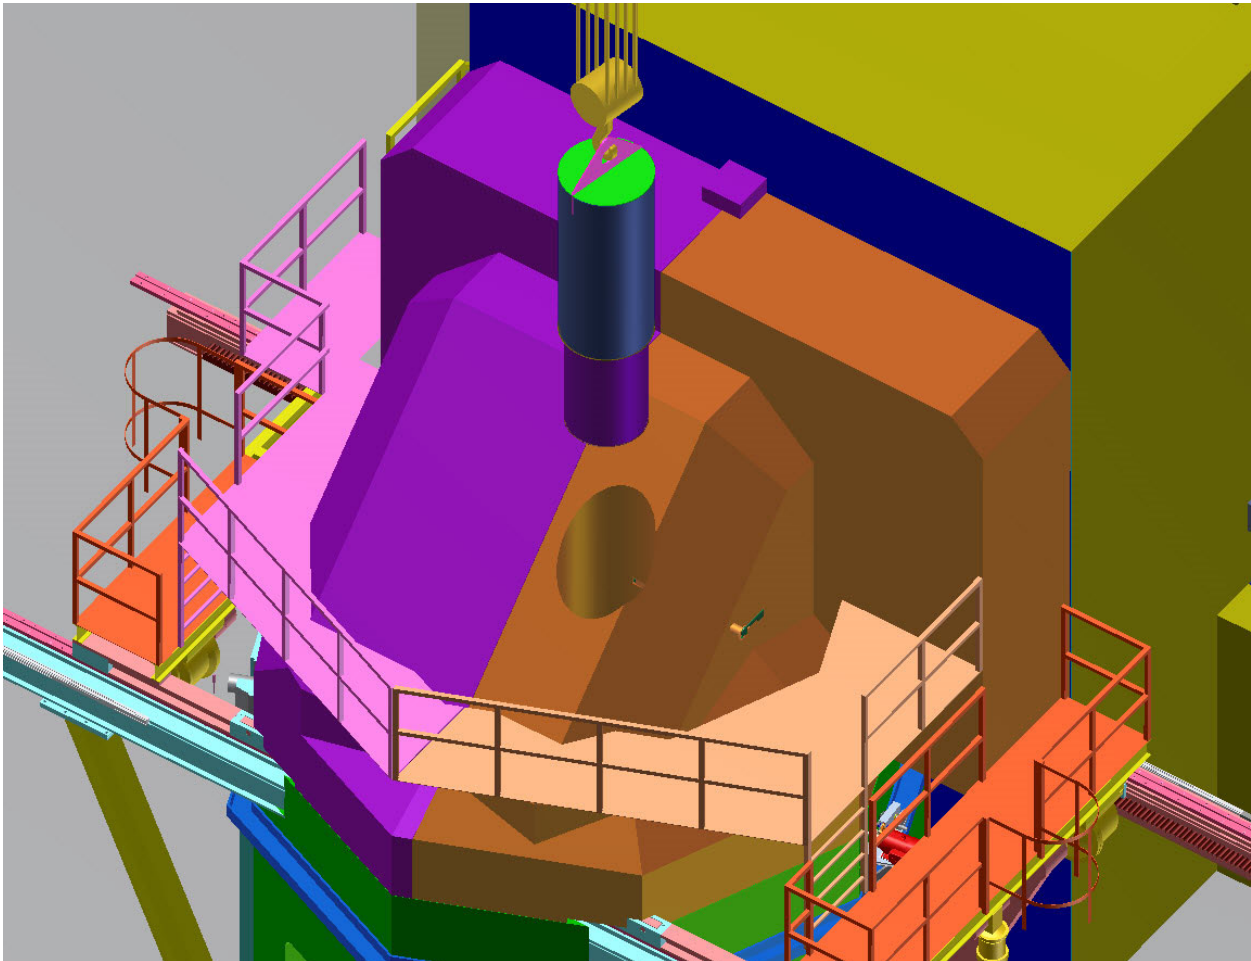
Movable top shield shown with plug removed for fuel transfer operation.
